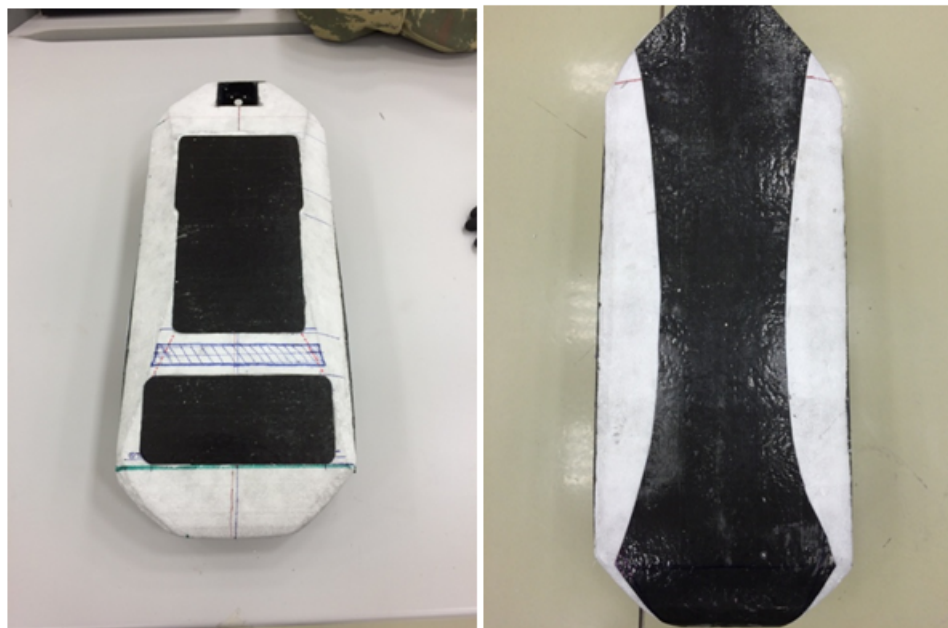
Upper and lower surfaces of the manufactured fuselage
